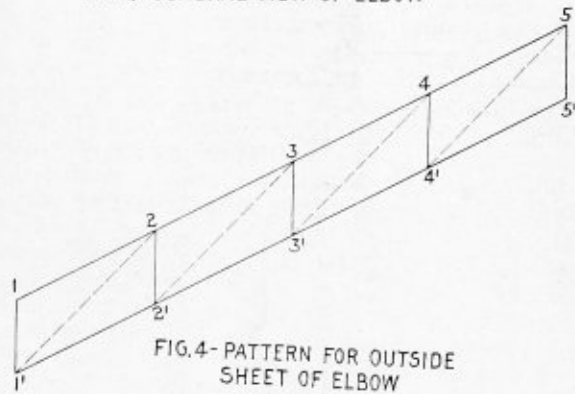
PATTERN FOR OUTSIDE SHEET OF ELBOW
